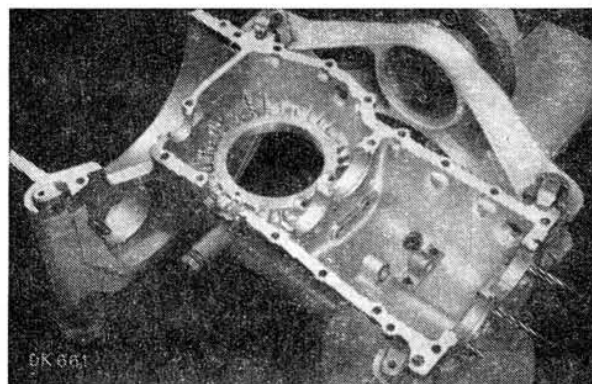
/1 - Clamping Gearbox Housing in Stand Using MP 3-101 Rack
